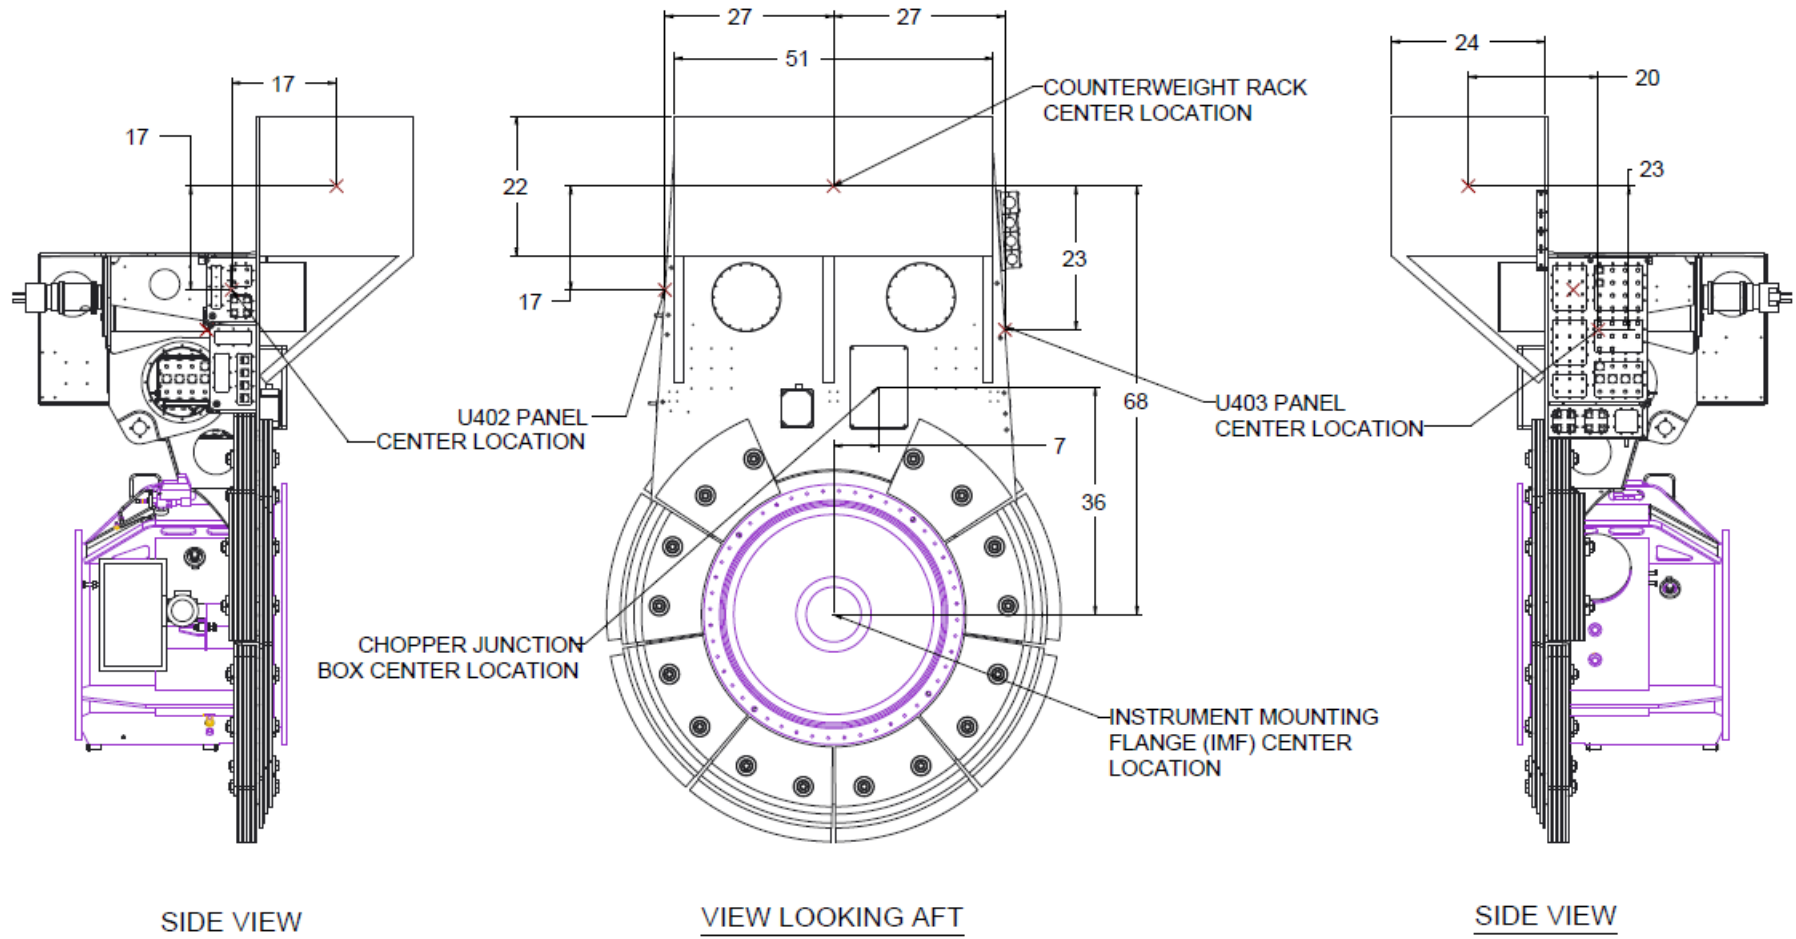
Views of Telescope Assembly Counterweight Plate and Instrument Mounting Flange
